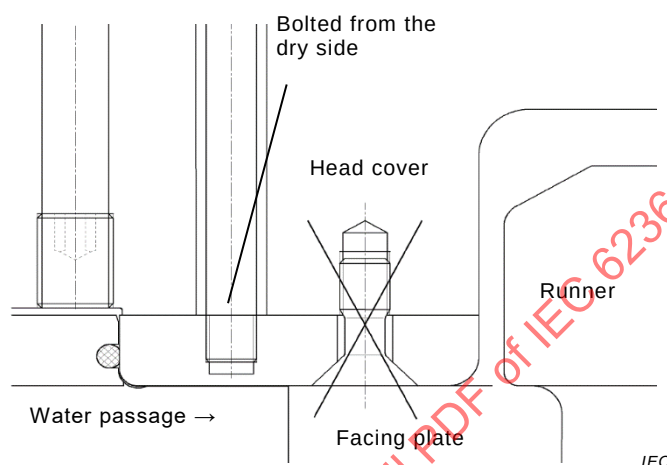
Example of fixing of facing plates from the dry side (bolt to the left)
